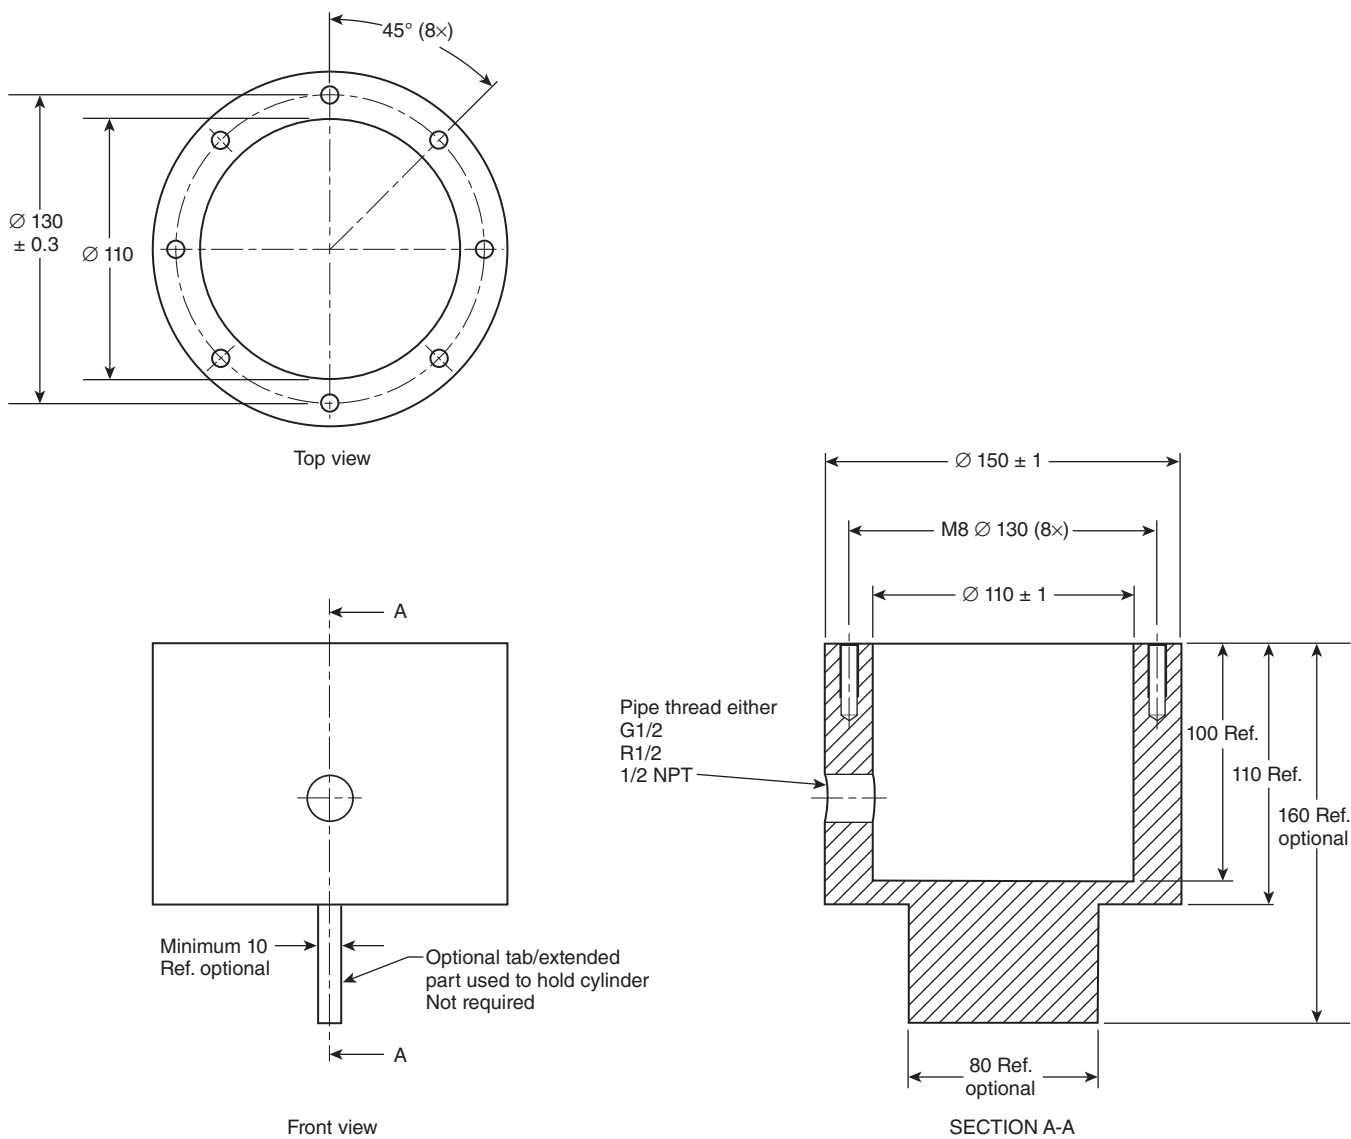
Lifting Bag Penetrator Test Cylinder.
